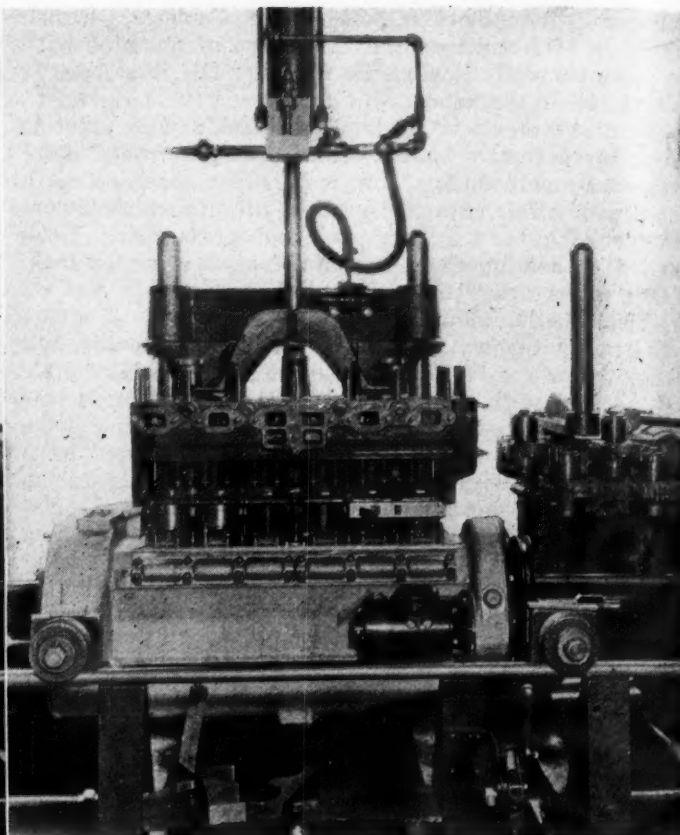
Two caps have been removed, rings have all entered cylinders but block is still supported by cross slide
